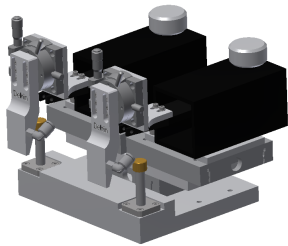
Bending jig with micro positioners and vacuum nozzles
